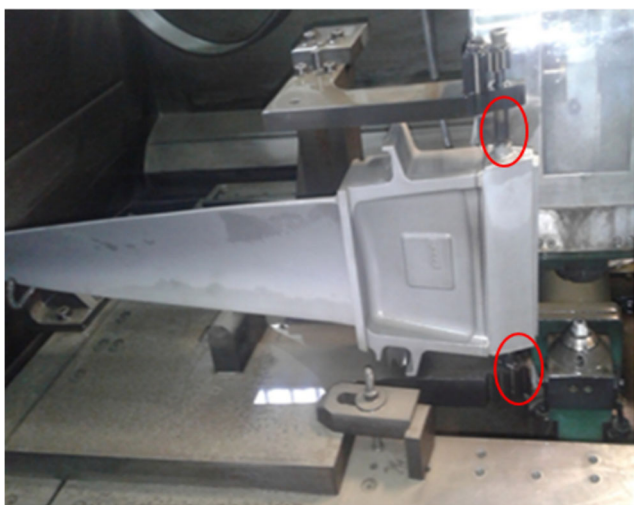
Machining device intended for machining the tree root of the blade with wire EDM
